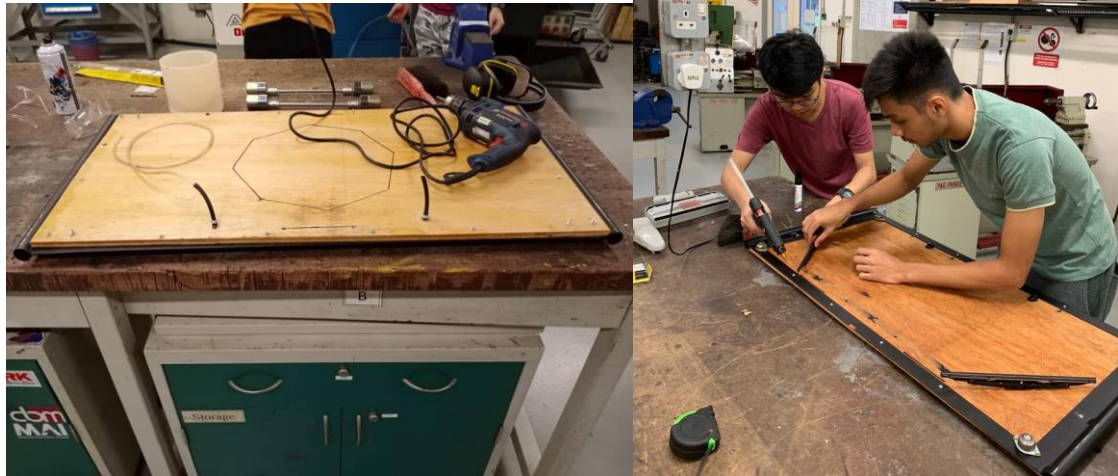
Attaching sprinklers and wipers to the bottom of the platform
